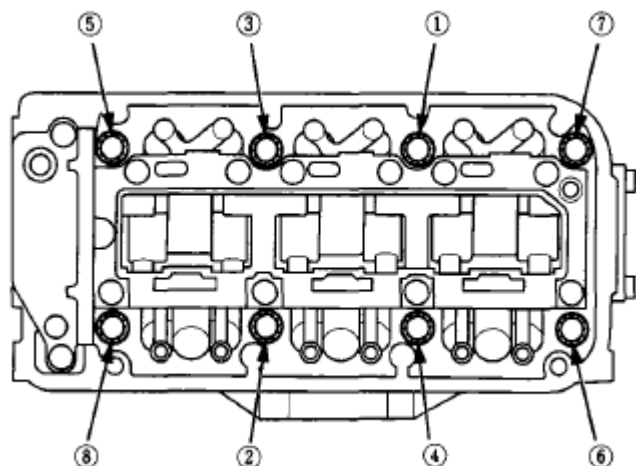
Identifying Cylinder Head Bolts Tightening Sequence - Front
